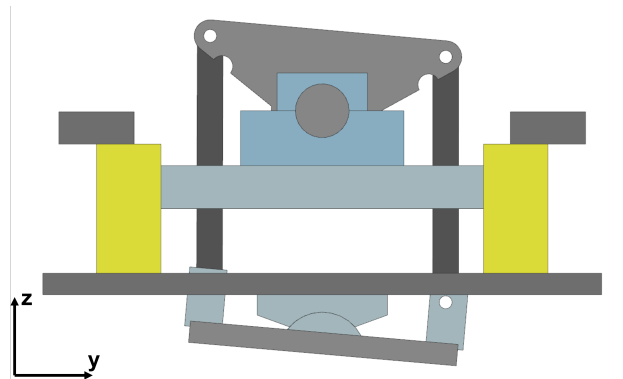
Cross-section, in the y - z plane, of the plank in a cambered position.
